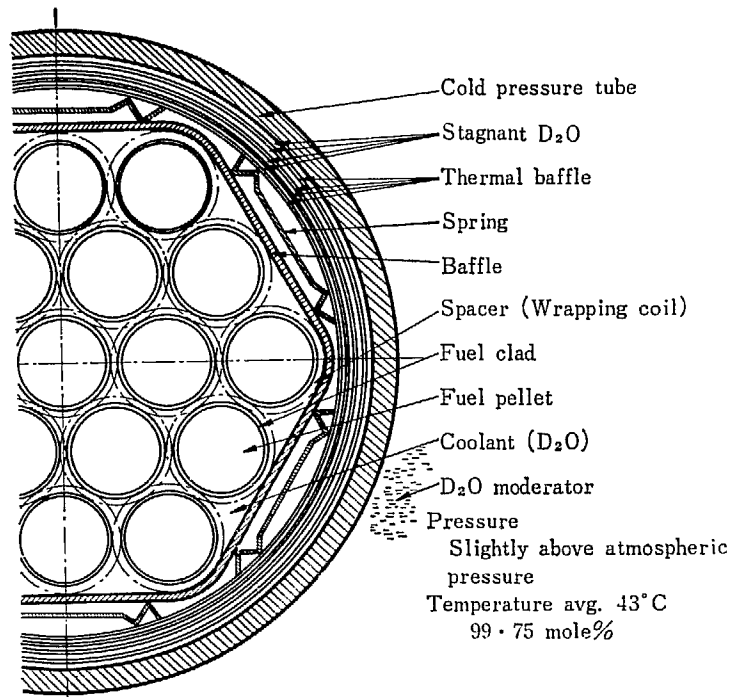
D₂O cooled reactor fuel and pressure tube system
